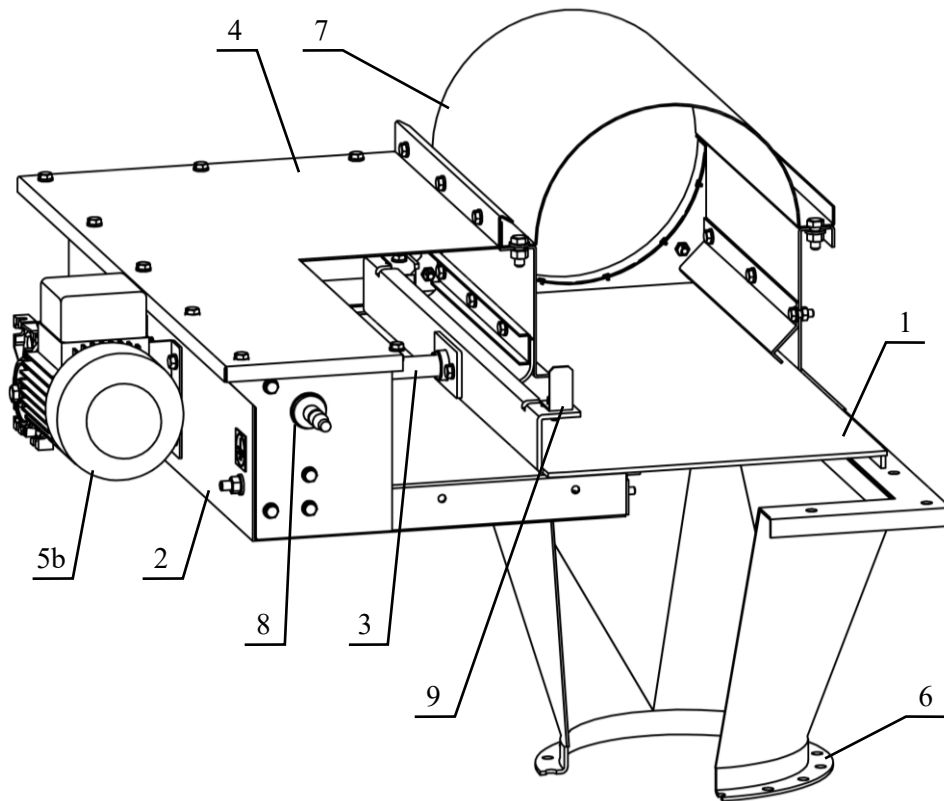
Design of shutters of the PSX... type - ZAS/E (driven by an electric motor) 1 – shutter plate, 2 – body, 3 – feed screw with a nut, 4 – cover, 5b – an electric motor, 6 – outlet spigot, 7 – clamp of the conveyor fixing, 8 – plate position sensor, 9 – sensor trigger.
